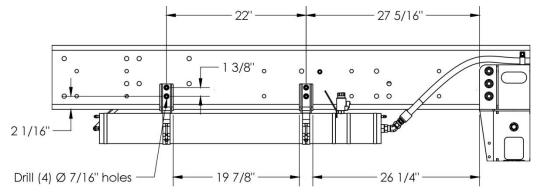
Volume Mount Drilling Location, DS150FR-SS Passenger and Driver Side.
